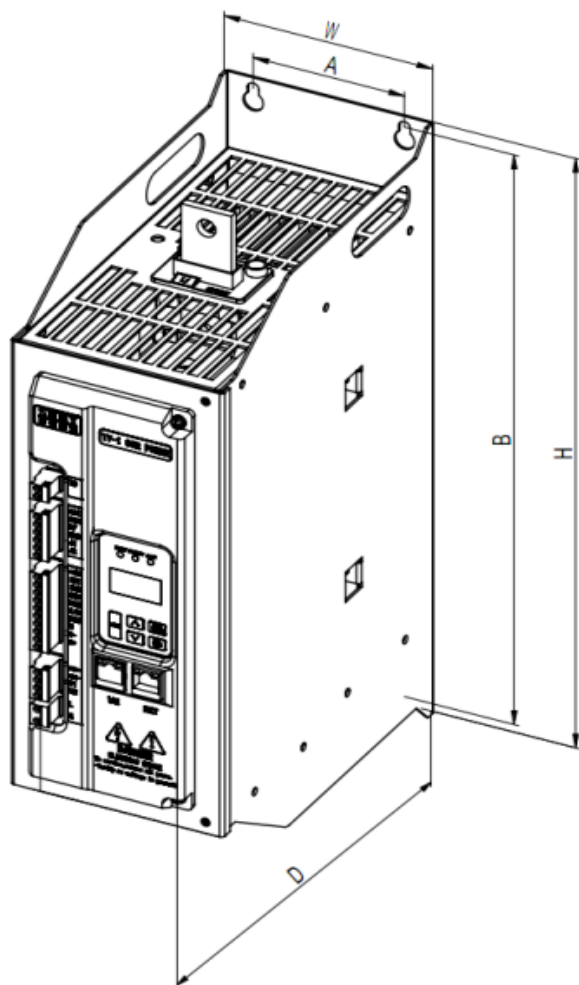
outline dimension and installation dimension of FTM1 series
